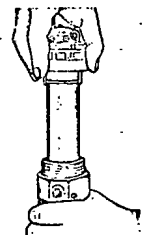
MOUNTING FIRING MECHANISM WITH EXPLOSIVE CHARGE ON EJECTION GUN
